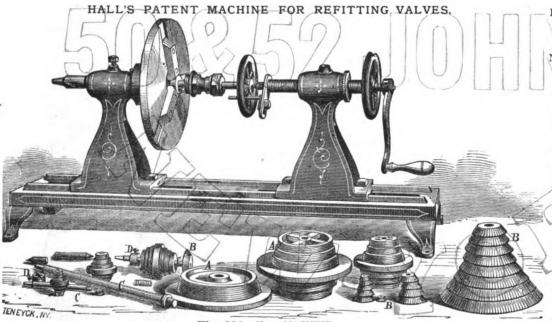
No. 7 MACHINE. By this machine, Valves can be repaired on the Pipes or Boilers without disconnecting, thereby saving
